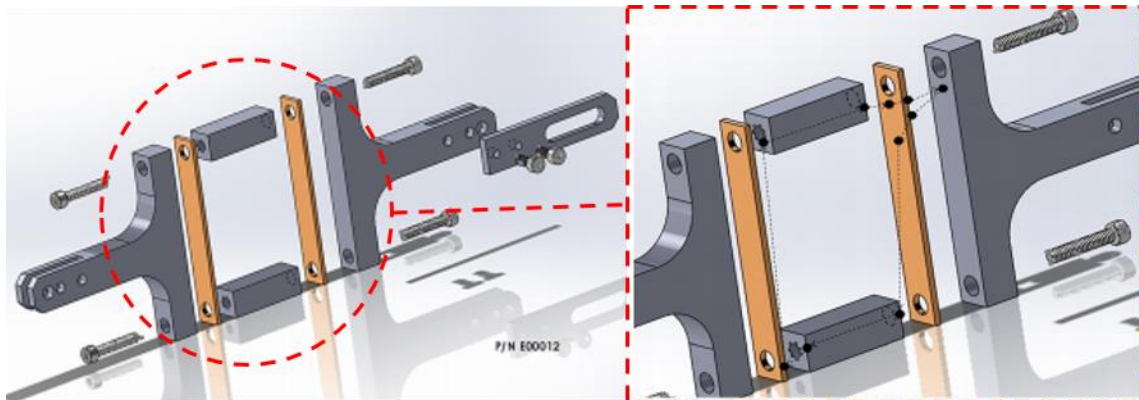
5 Assembly Constraint Loop on Cam Follower Assembly
